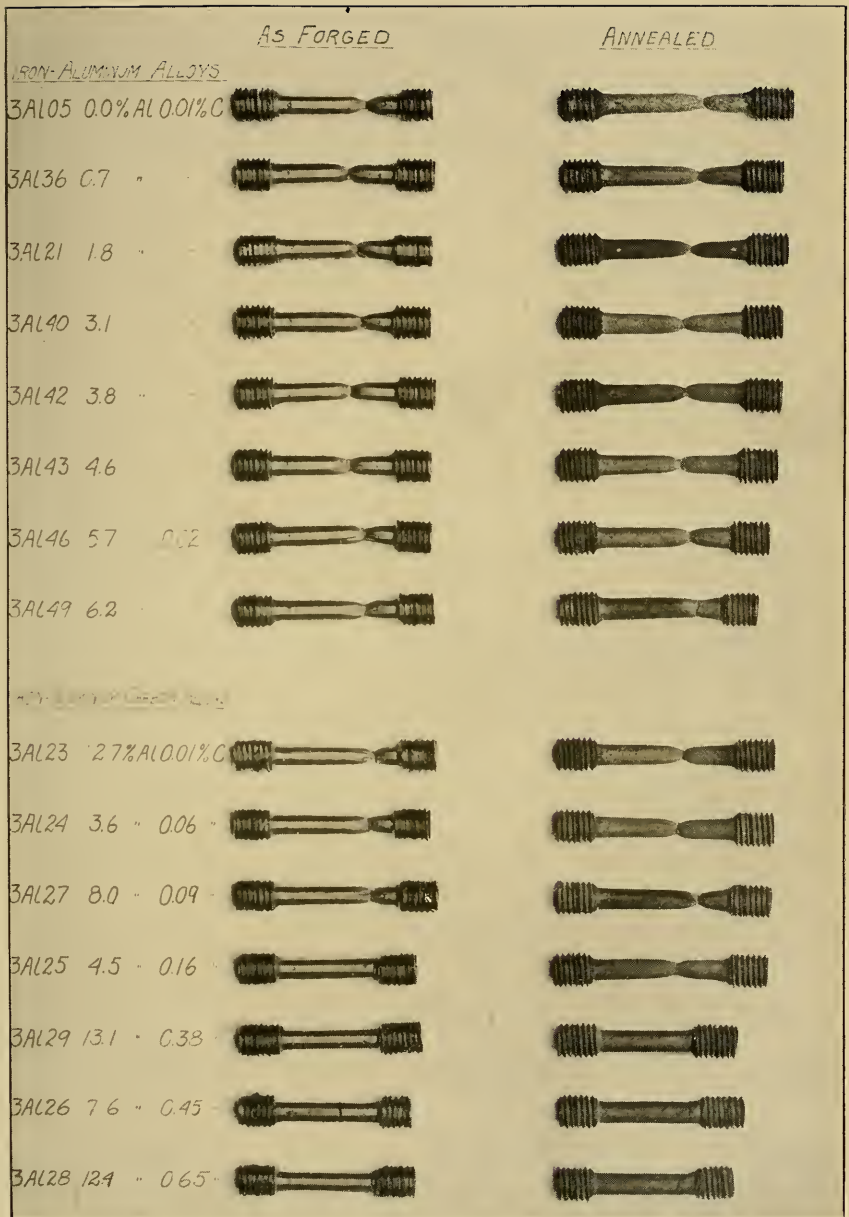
SOME OF THE MECHANICAL SPECIMENS AFTER BEING TESTED
